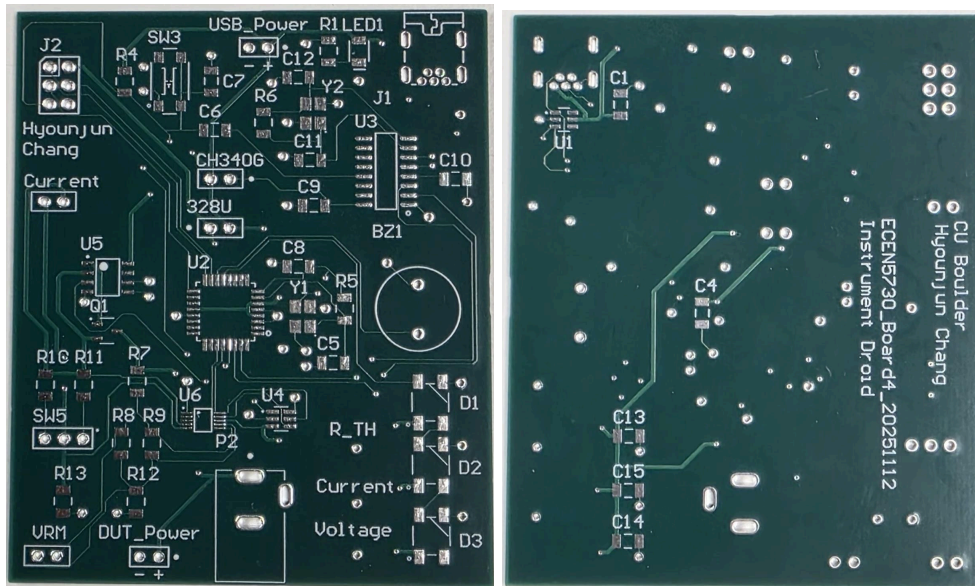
Unassembled Instrument Droid PCB (Left: Front, Right: Back)
